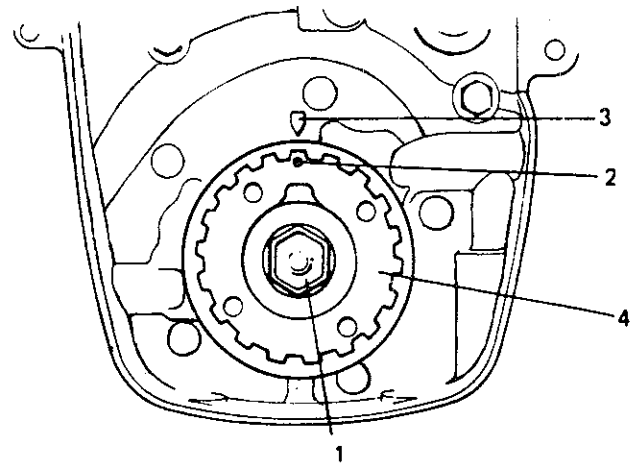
Camshaft sprocket timing mark. 1.3L SOHC engine. Models built since June 1993
